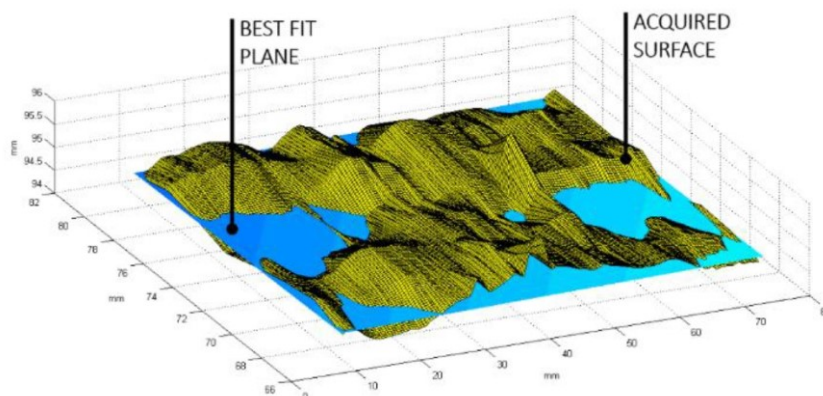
The surface constructed using the points acquired with the CMM machine and the best fit plane for a specimen manufactured using strategy S4
